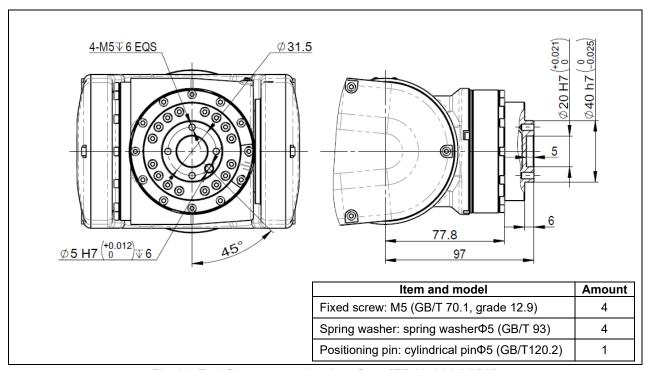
End flange mounting interface (ER10-900-MI/HI)
